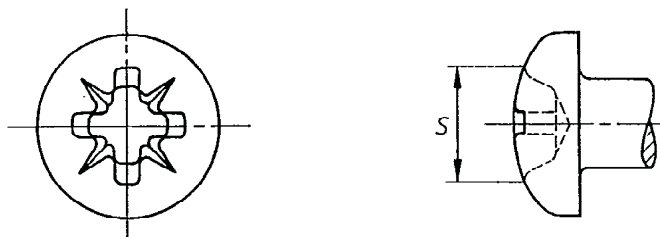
Recessed pan head machine screws: enlarged views of recess type Z
